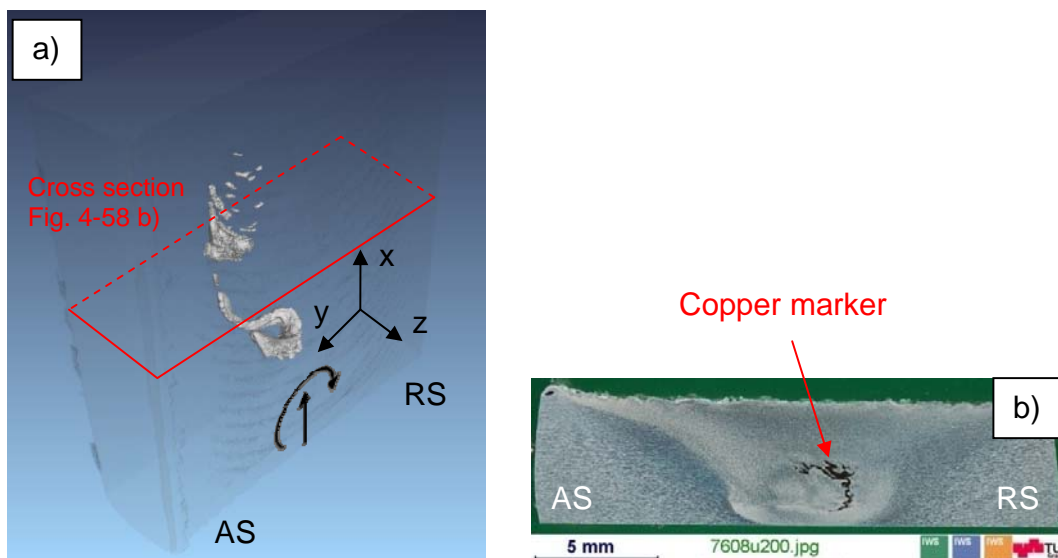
3D CT image of copper marker P002G after welding a) and macrograph of cross section showing marker P002G b)
